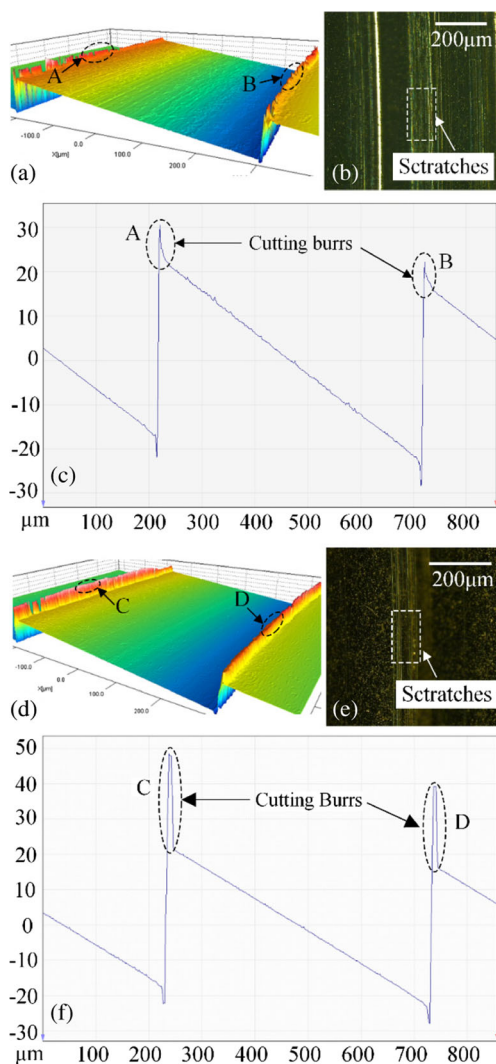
Experimental results of the first machining. Workpiece 1: a obvious burrs on the sharp corners (in three dimension), b obvious scratches on the machined surface, and c obvious burrs (in two dimension). Workpiece 2: d obvious burrs on the sharp corners (in three dimension), e obvious scratches on the machined surface, and f obvious burrs (in two dimension)
